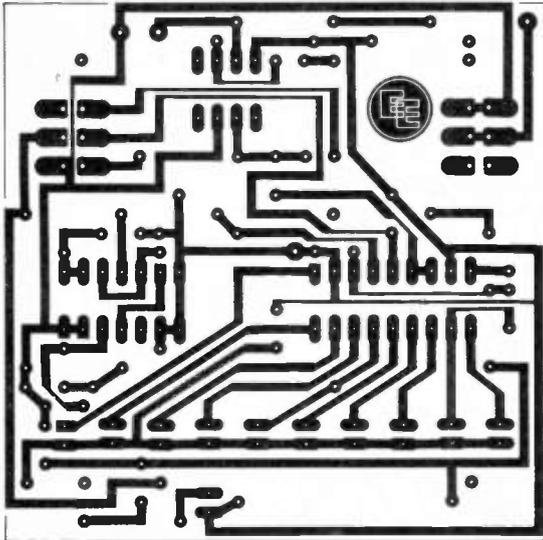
Full size p.c.b. artwork and component layout. All the l.e.d.s are soldered into the board at the same height of approximately 20mm (to the top of the lens).
